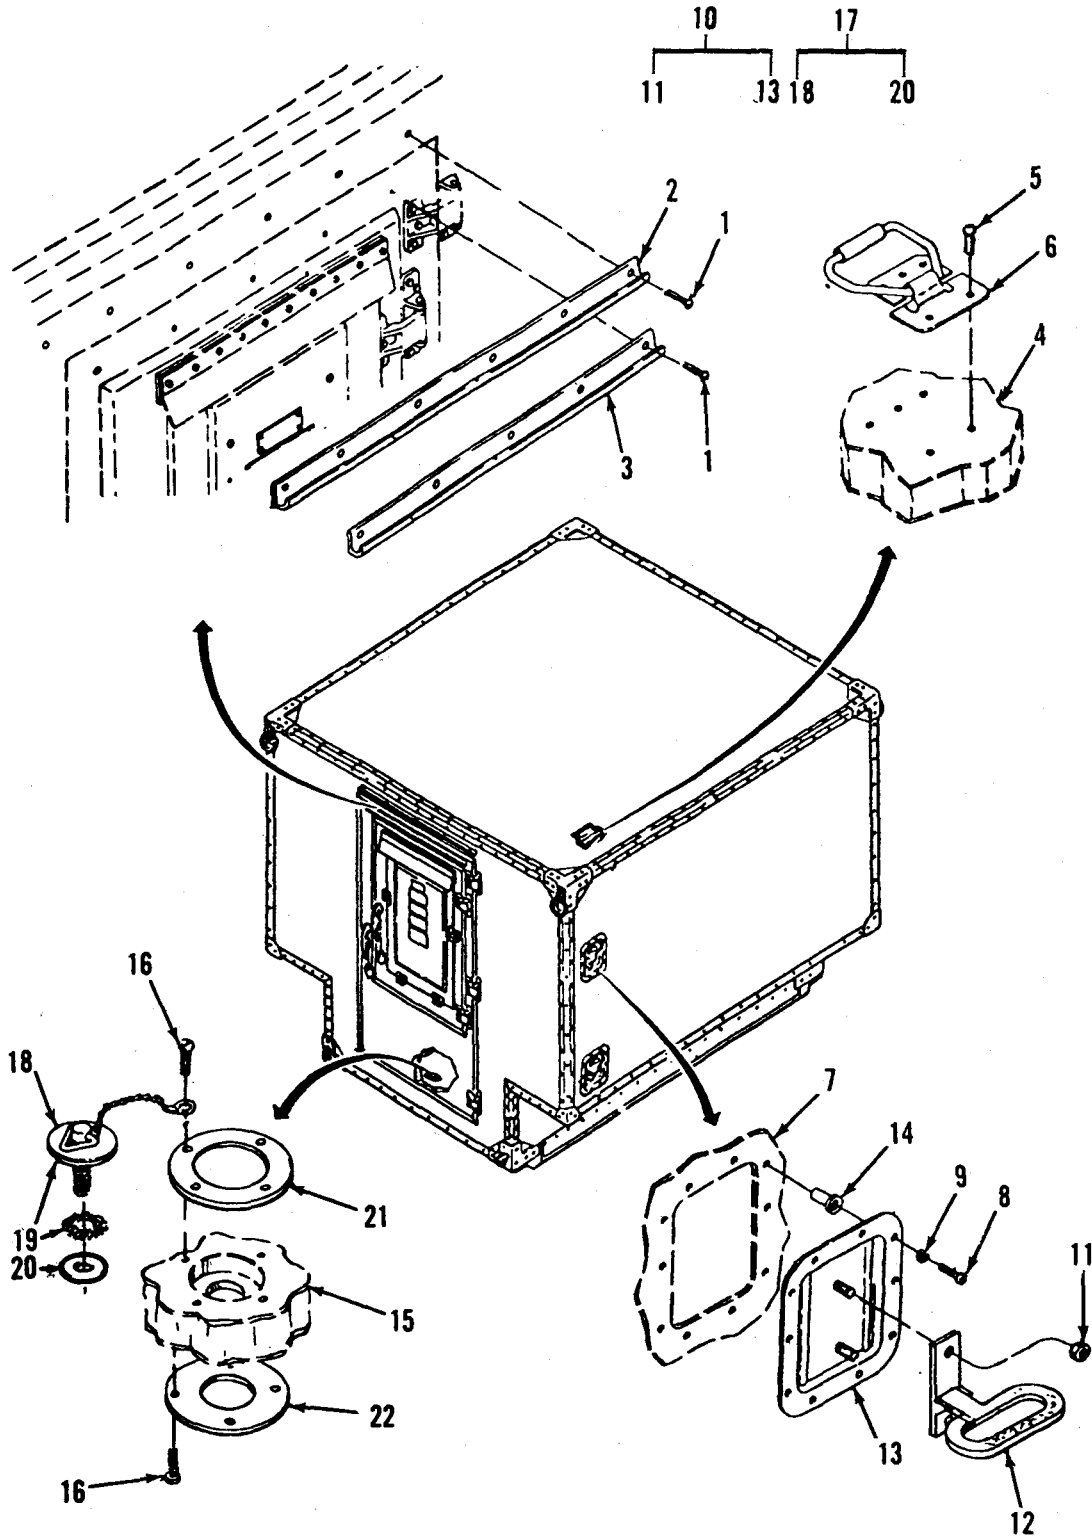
Shelter, Electrical Equipment S-250/G (Sheet 1 of 4)
